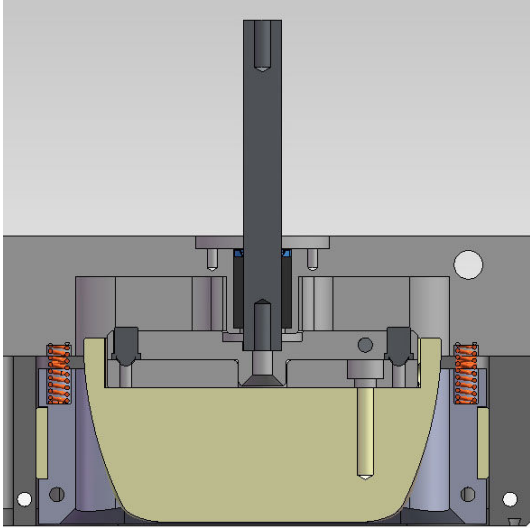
Cross section of pressure box showing the prototype water cooled individual sprung loaded flange clamp and plug
